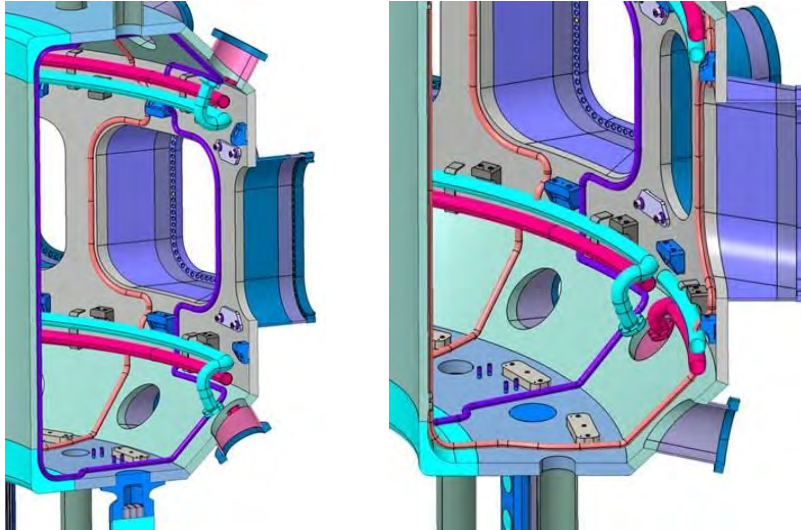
Left and right: Close-up to welded components (heating and cooling system in red and purple, pads in dark blue and grey) inside the VV assembly
